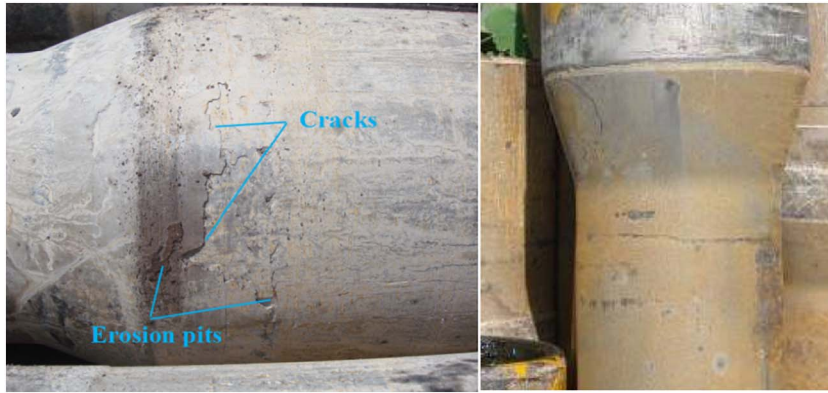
Cracks and erosion pits on the drill pipe surface.
